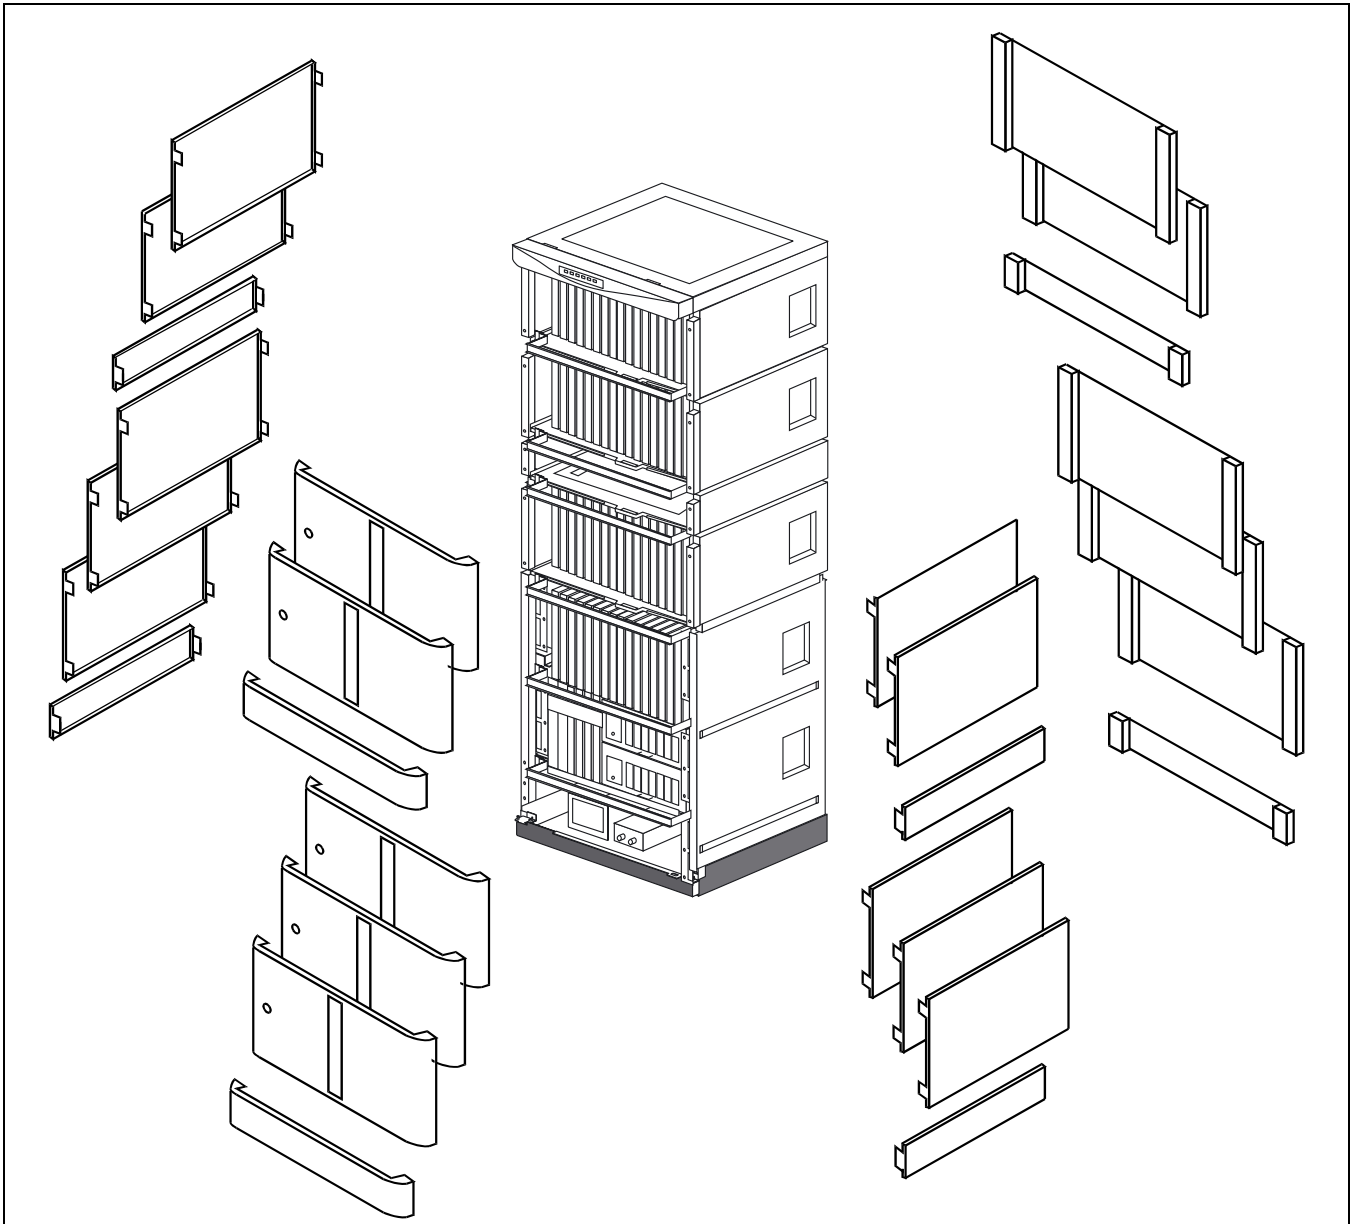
Side Cover Mounting Method (BASEU+LPR+PIM0)
